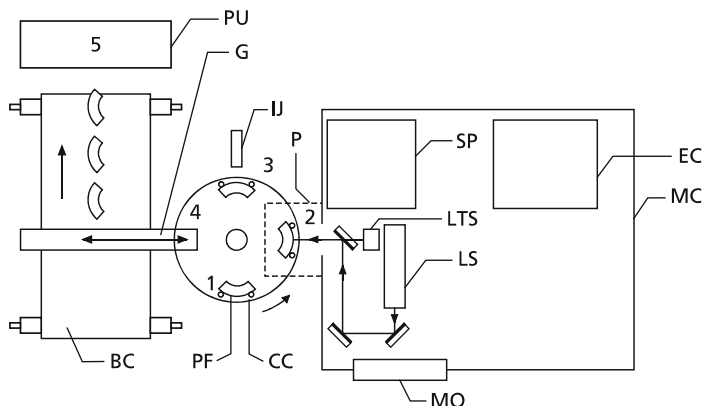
Schematic setup of the inspection machine LIFT for the automated identification of steel grades of pipe fittings. PF = pipe fitting, CC = table type circular conveyor, P = protection cover, MC = machine cabinet, EC = electric cabinet, MO = monitor, operation panel, LS = laser, LTS = laser triangulation sensor, SP = spectrometer, IJ = ink jet marker, G = gripper, BC = belt conveyor, PU = packaging unit. The numbers one to five indicate the sequence of actions. 1 = input of pipe fitting to be inspected, 2 = inspection with LIBS, 3 = marking of the specimen, if result of inspection is okay, 4 = the gripper takes the specimen and puts it on the belt conveyor, 5 = packaging of the specimens
